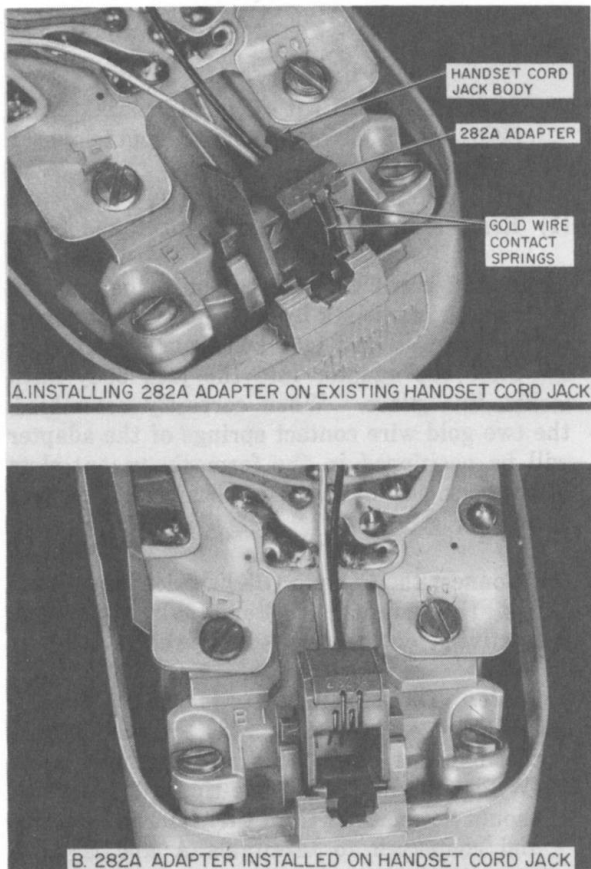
D-180825 Kit of Parts Installed in 220C, 226A, 2220C, or 2226A Hand Telephone Set
